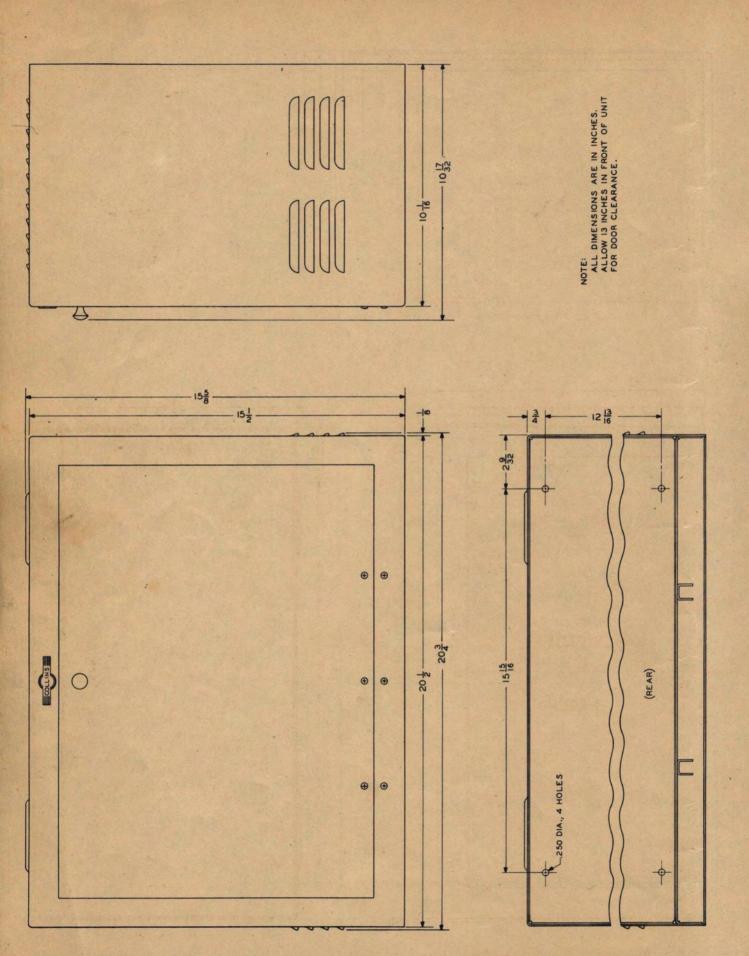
Type 409U-1 Power Supply, Outline and Mounting Dimensions
